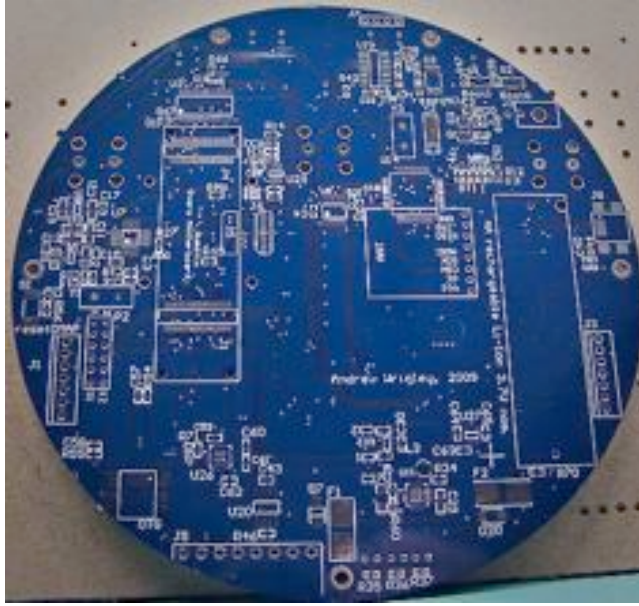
Photograph of bottom side of unpopulated version 2 PCB.
